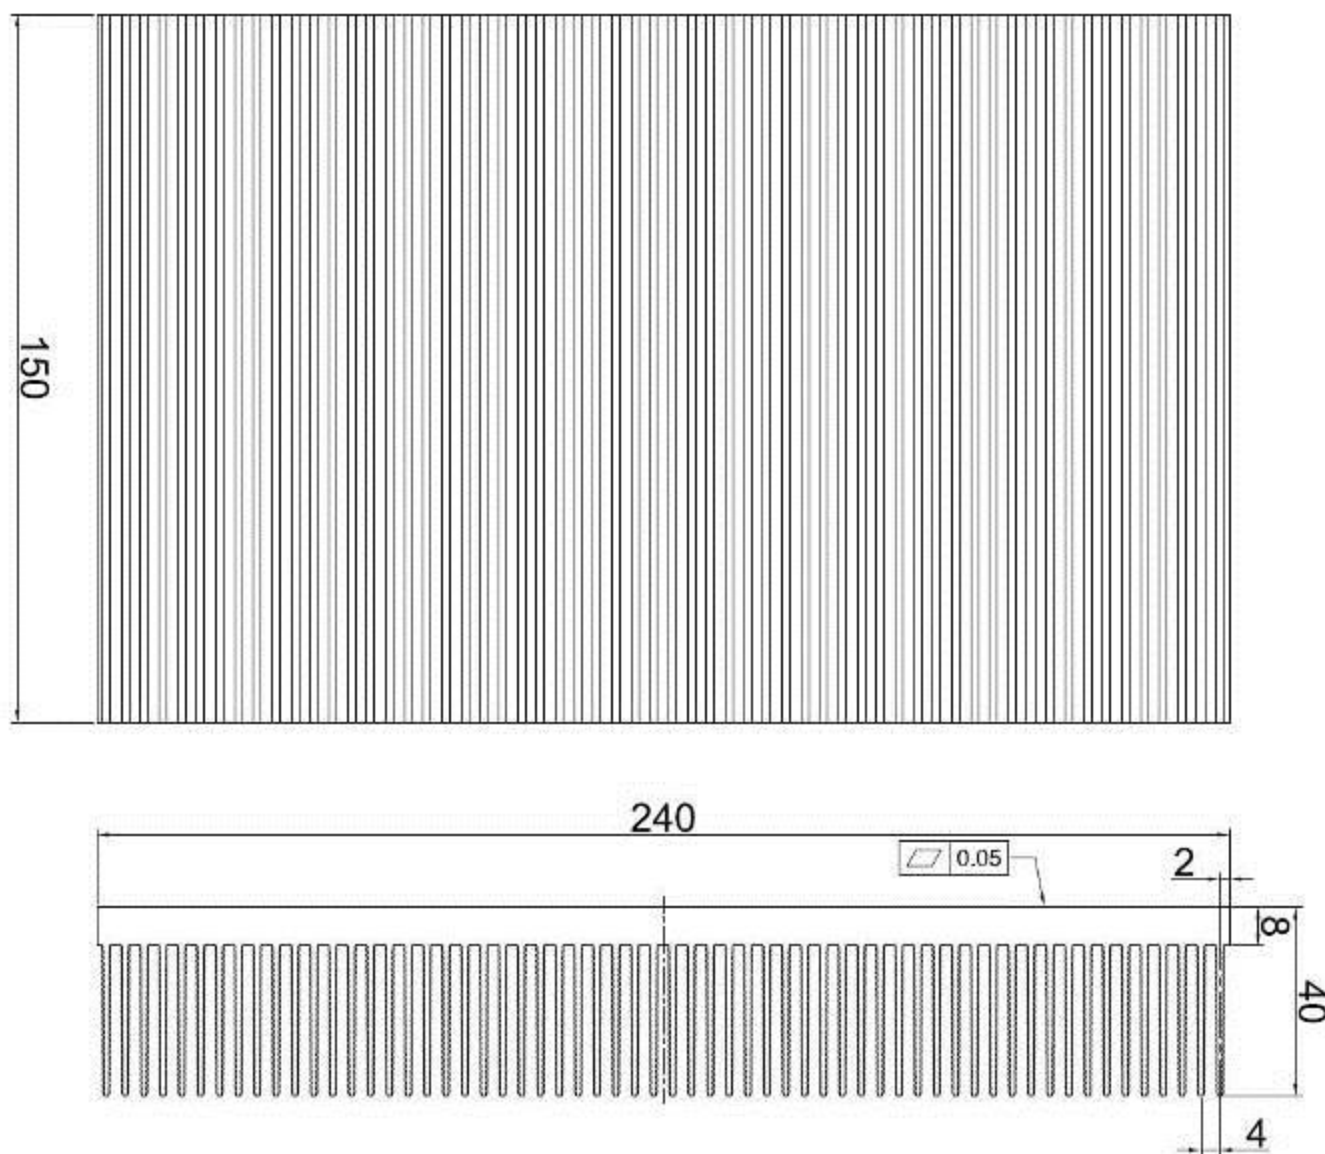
Mechanical Dimensions of Heat Sink ATHS-4/240/150/40A
